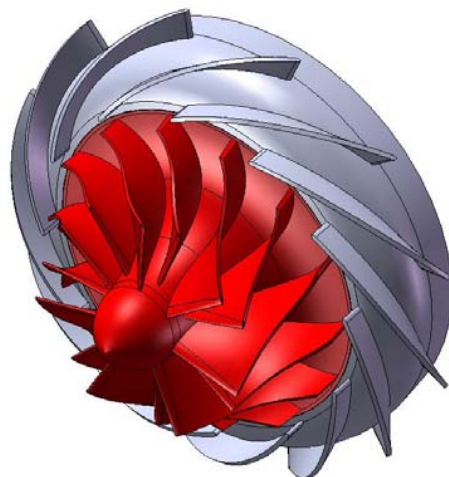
3D model of the new compressor stage incorporate 71mm impeller wheel
